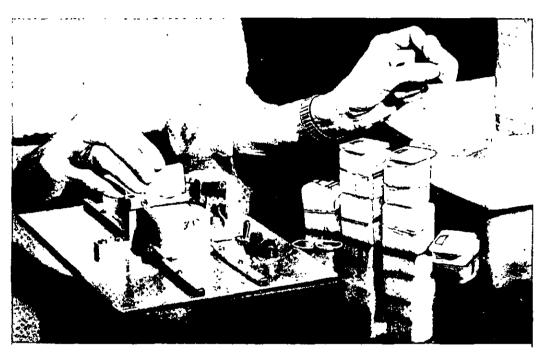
LOADER-MARKER - RIGHT SIDE WITH COVERS REMOVED
